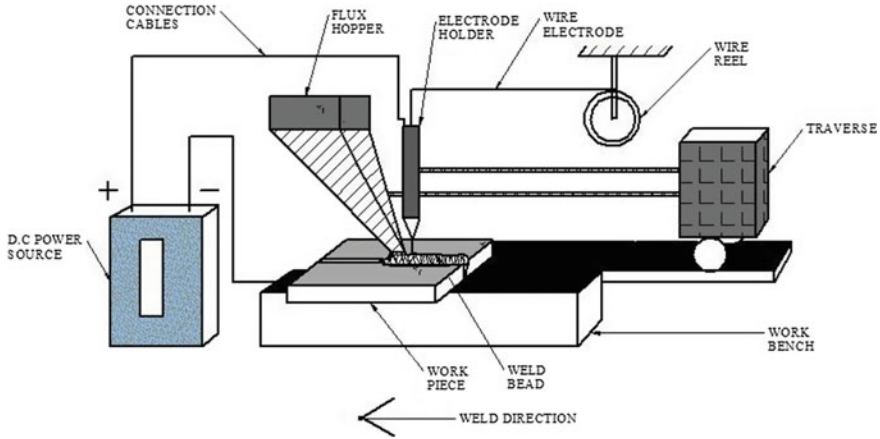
Schematic representation of SAW welding machine
